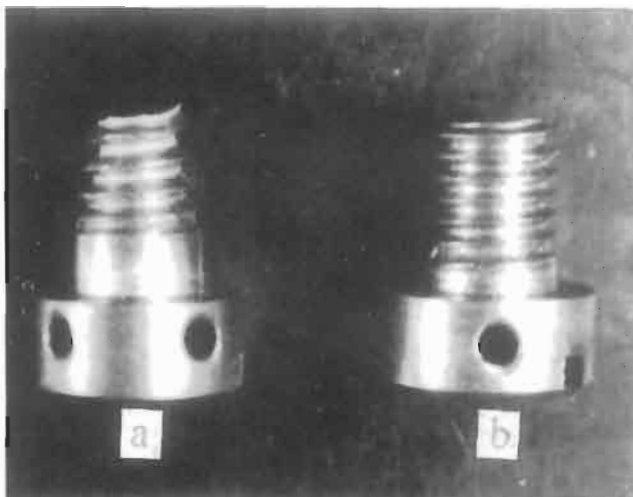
Comparison of fracture surfaces for (a) tensile fracture, and (b) 3# bolt fatigue fracture.
